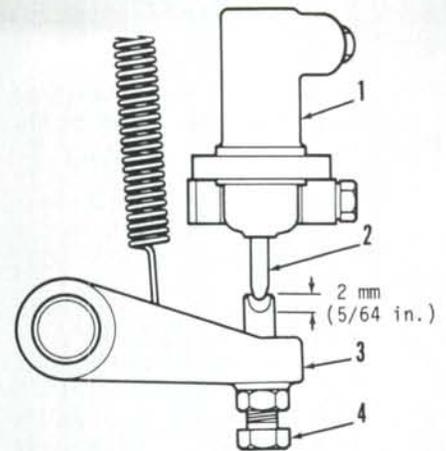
On 1194, 1290 and 1390 tractors equipped with a cab and independent clutch, clearance of 2 mm (5/64 inch) should be maintained between slave cylinder push rod (2) and adjusting screw (4). Refer to Fig. 153 for pto clutch linkage adjustment.
